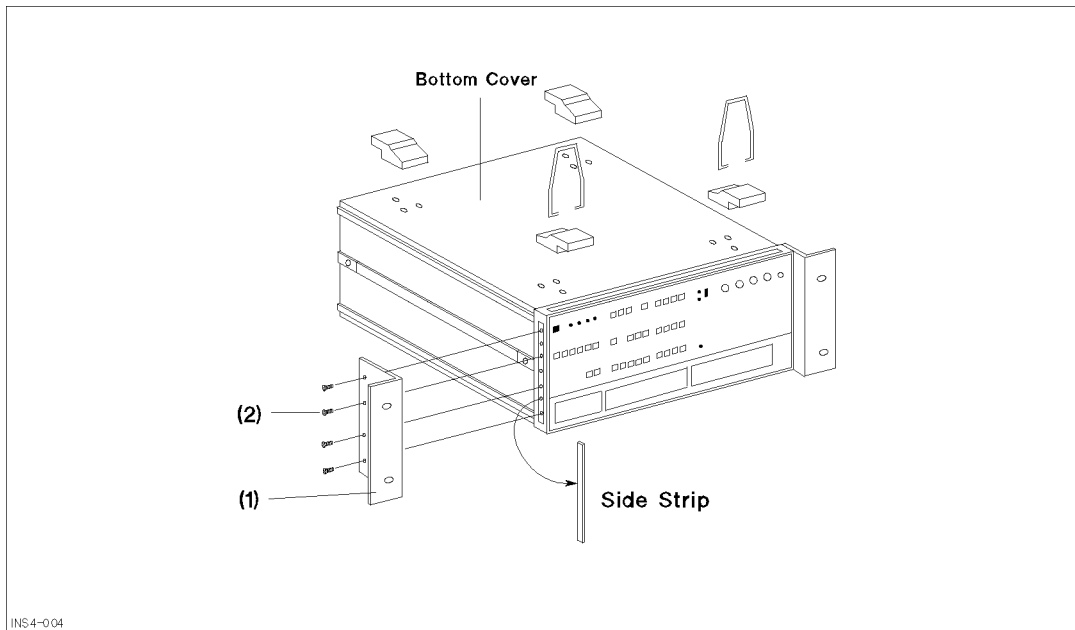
Attaching Rack Flanges to the HP 4280A
